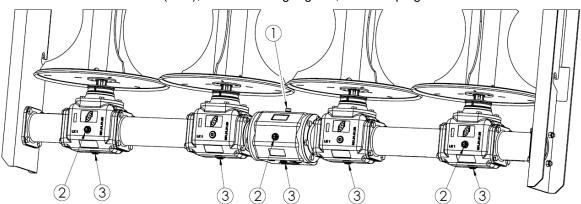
Oil level control points in the 4-auger adapter gearbox 1 - oil filler (vent), 2 - oil-level sight glass, 3 - drain plugs
